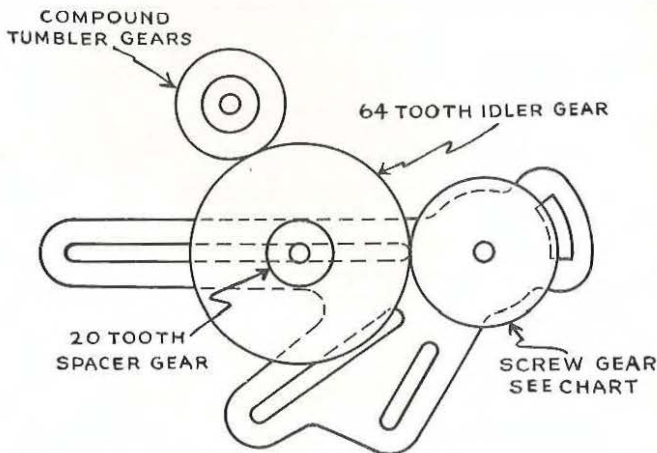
Gear set-up for 8 through 16 threads per inch.
